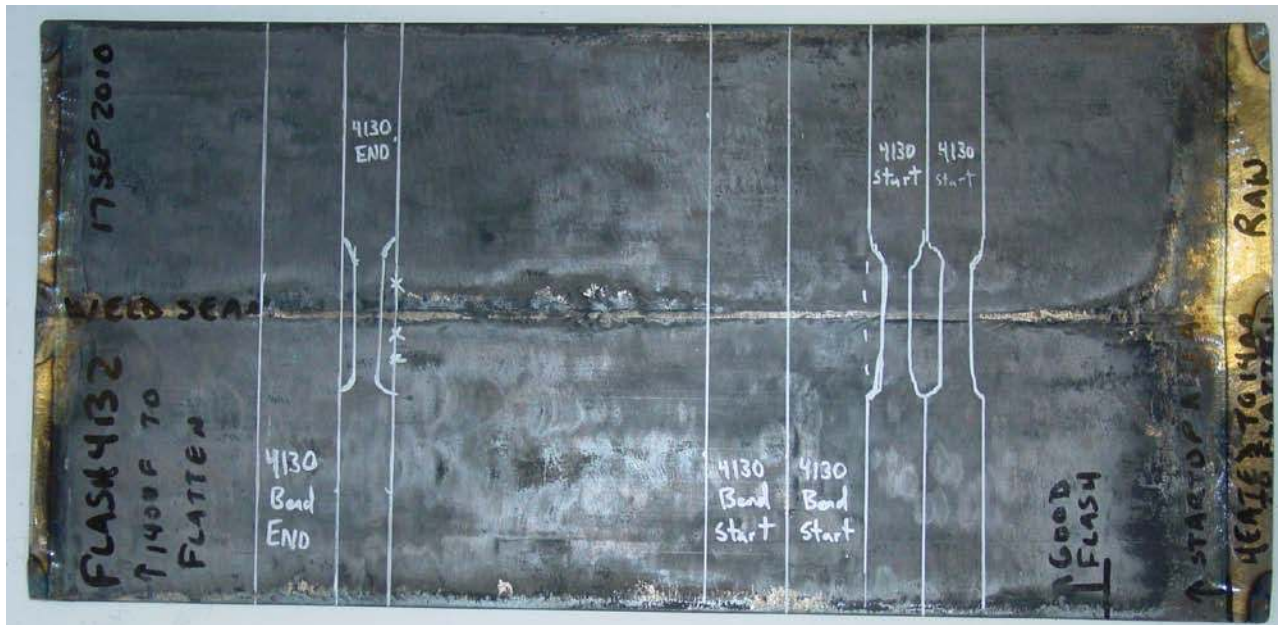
Conventional plate that was cut longitudinally then welded back together and subsequent FB processed. Note location of bend and tensile specimens welded back together.
